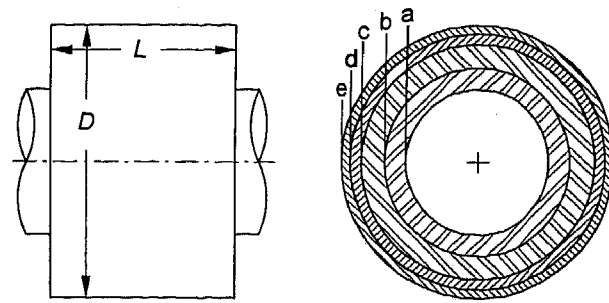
Details of experimental ring assembly. Inner two rings - OQ & T AISI 4340; "Insulator" ring - Carpenter 22 Cr 13 Ni 5 Mn; Outer ring - Teledyne Vasco C-250, aged 3 h @ 483 °C. Axial length $L = 45.7$ mm. Outside diameter = 66.0 mm. Nominal radii at each indicated interface: $a = 17.6$; $b = 22.9$; $c = 28.7$; $d = 31.2$; $e = 33.02$.
